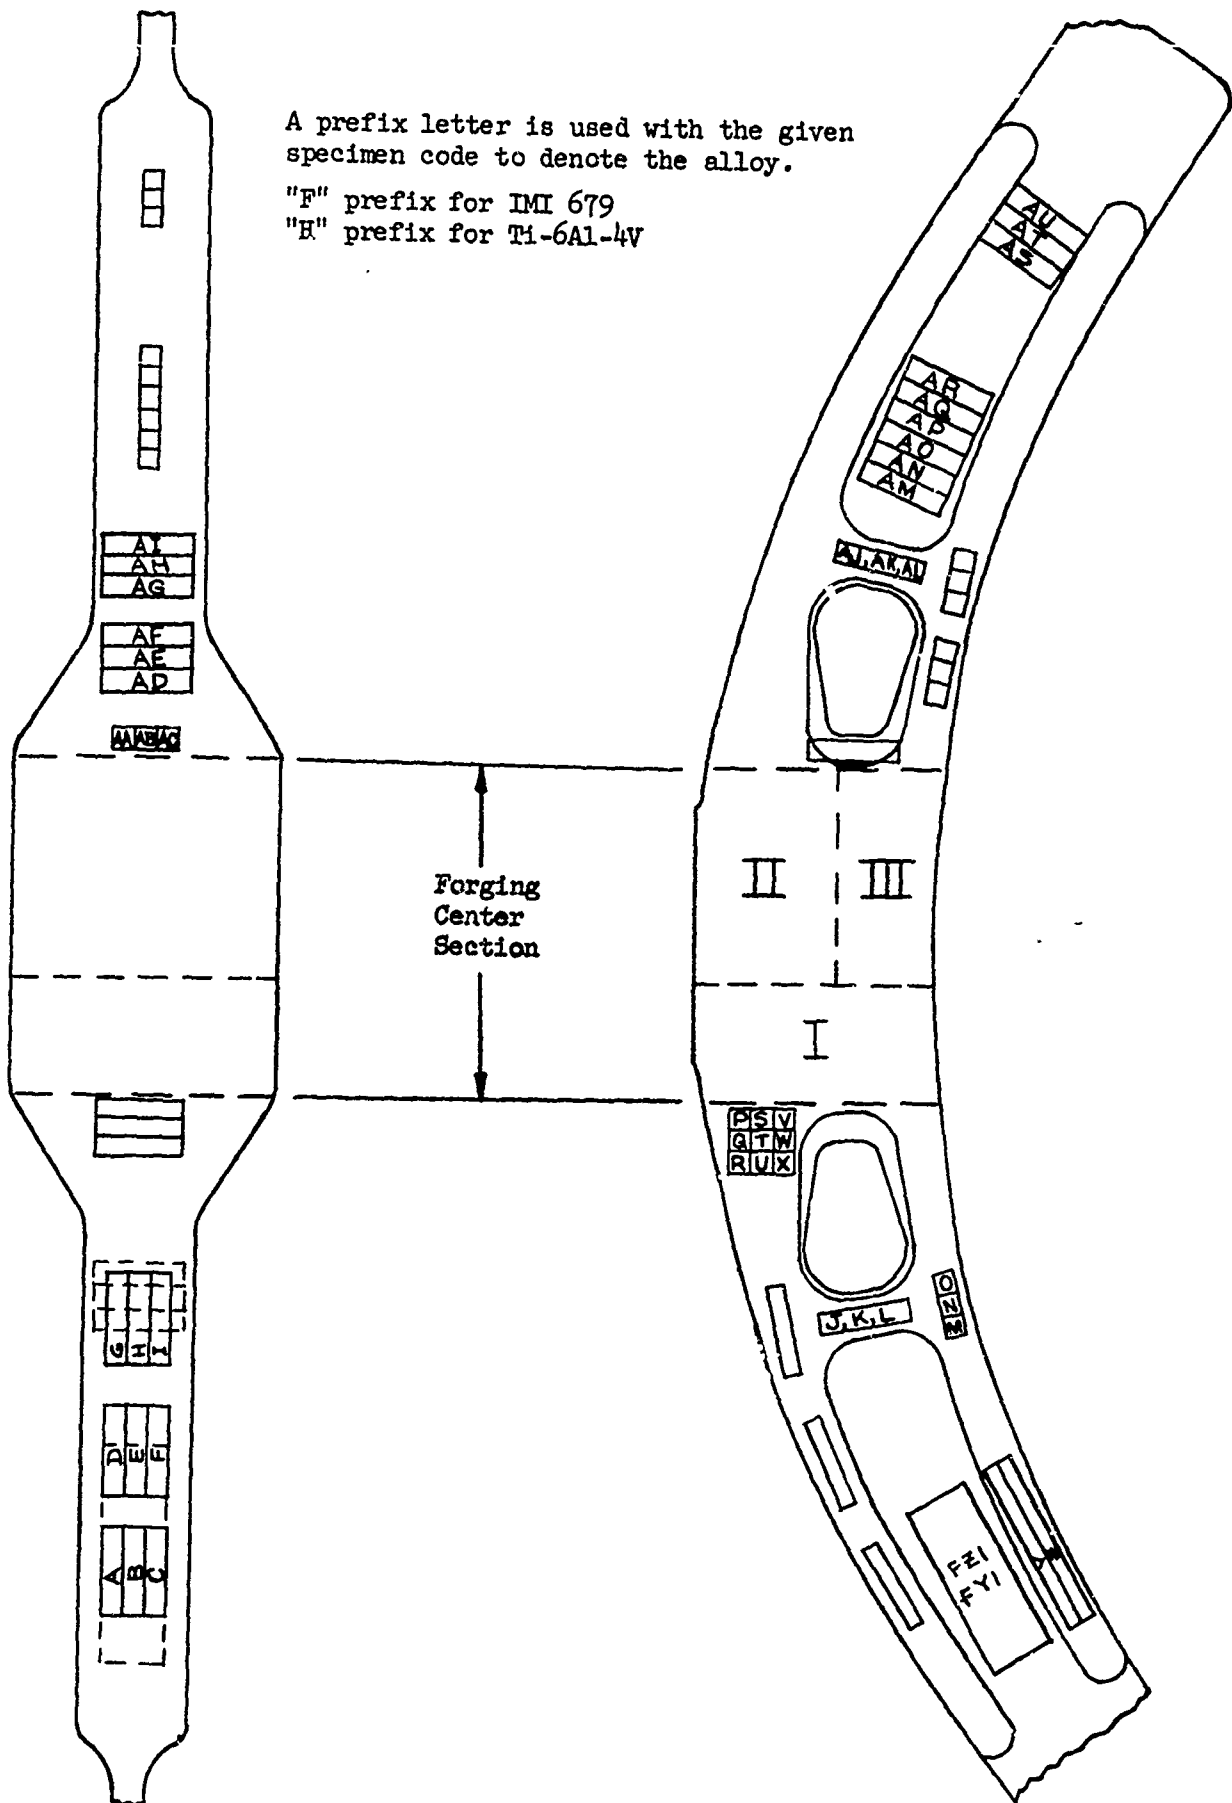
Specimen Layout First Forging IMI 679 and Ti-6Al-4V
